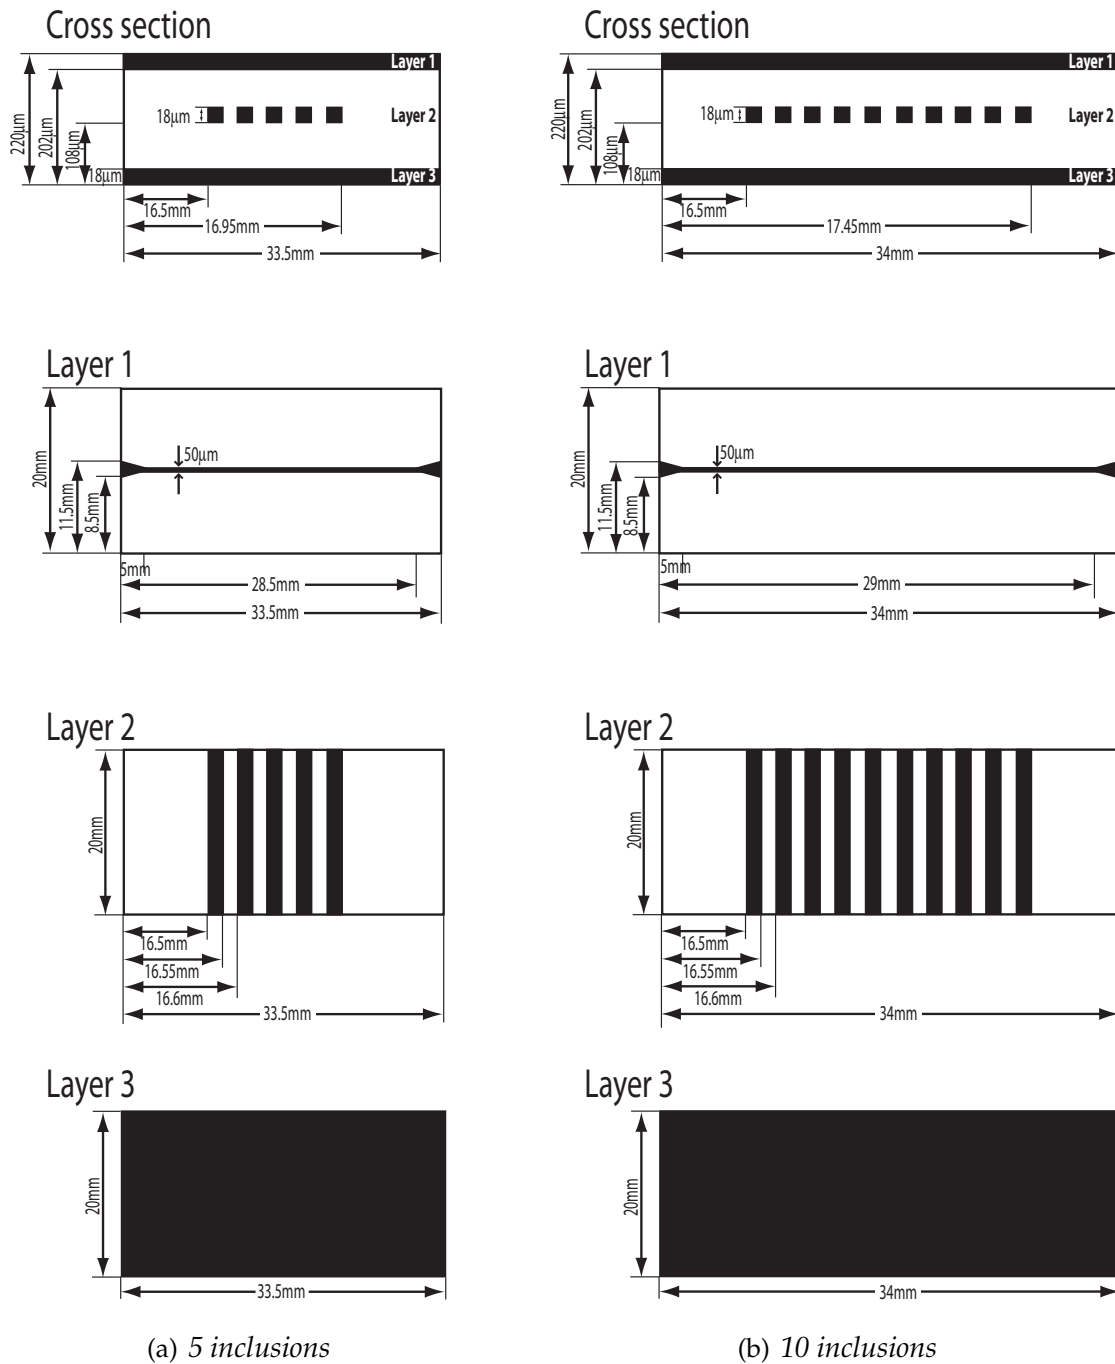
Technical drawing showing the cross section and three layers of the multilayer PCB for the microstrip prototype with: (a) five embedded copper bars, (b) ten embedded copper bars.
